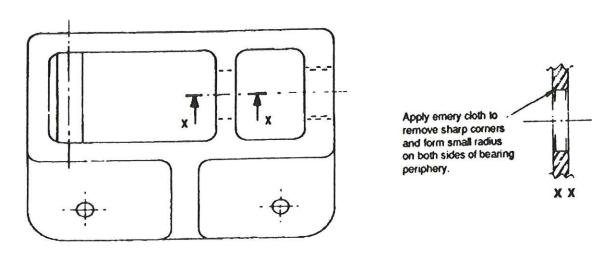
FIGURE C - CAST IRON HOUSING & PLUNGER BEARING DETAIL
